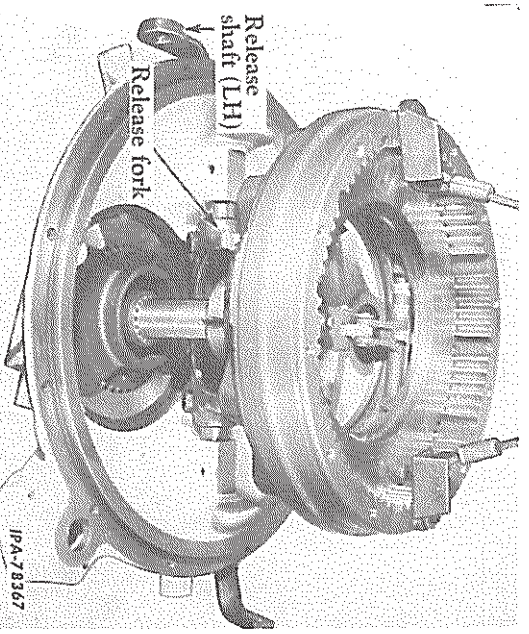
Removing the Drive Ring from the Clutch Housing
